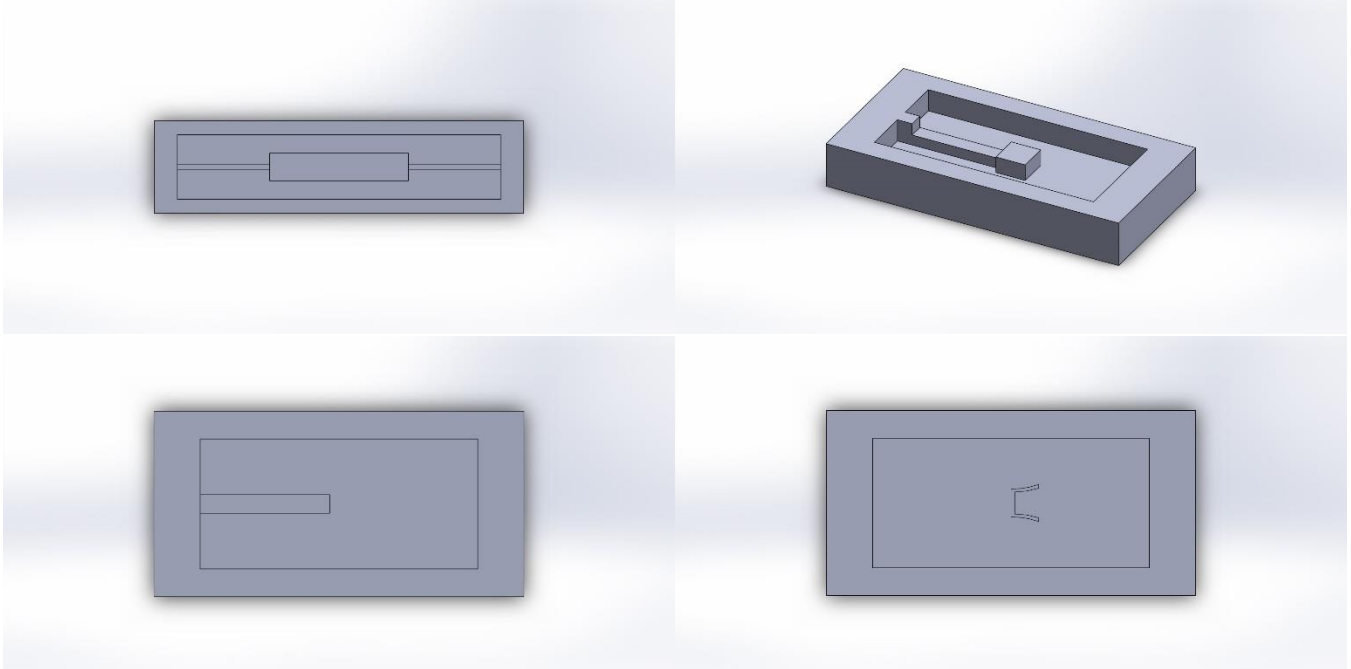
Left Top) Microfluidic pump mold, Right Top) Outlet mold, Left Bottom) Inlet mold, Right Bottom) Membrane layer mold
